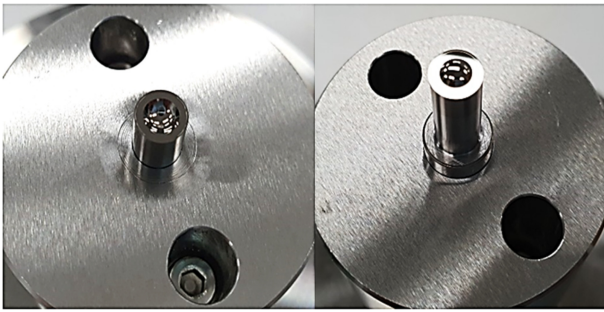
Ultra-precisely machined core molds for aspheric lens (left is upper core and right is lower core) with shape accuracy of 100 nm, and surface roughness of 5 nm
